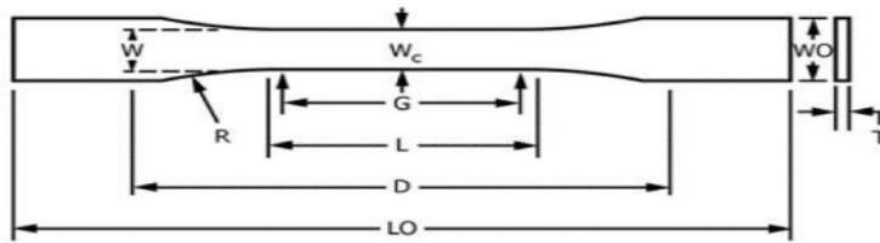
Dimensions of Tensile Test Specimens (ASTM, 2004)
